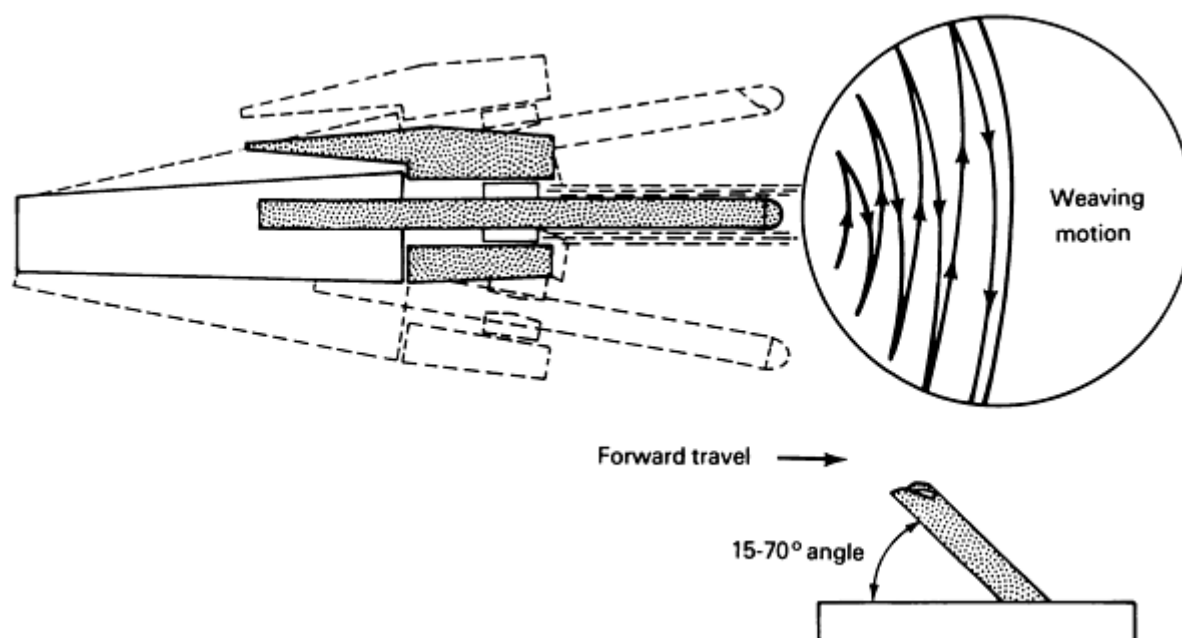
PAD-WASHING TECHNIQUE. THE TORCH REMAINS PARALLEL TO THE WORKPIECE, AND A WEAVING MOTION IS USED FORWARD ACROSS THE WIDTH OF THE AREA BEING CLEANED. THE ELECTRODE-TO-WORKPIECE ANGLE SHOULD BE FROM 15 TO 70°. THE MORE SHALLOW THE ANGLE, THE SMOOTHER THE FINISH; THE 70° ANGLE IS USED MAINLY ON CAST IRON.
